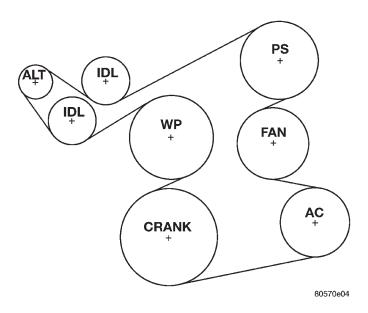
Models With 4.0L Engine—With A/C—With RHD
